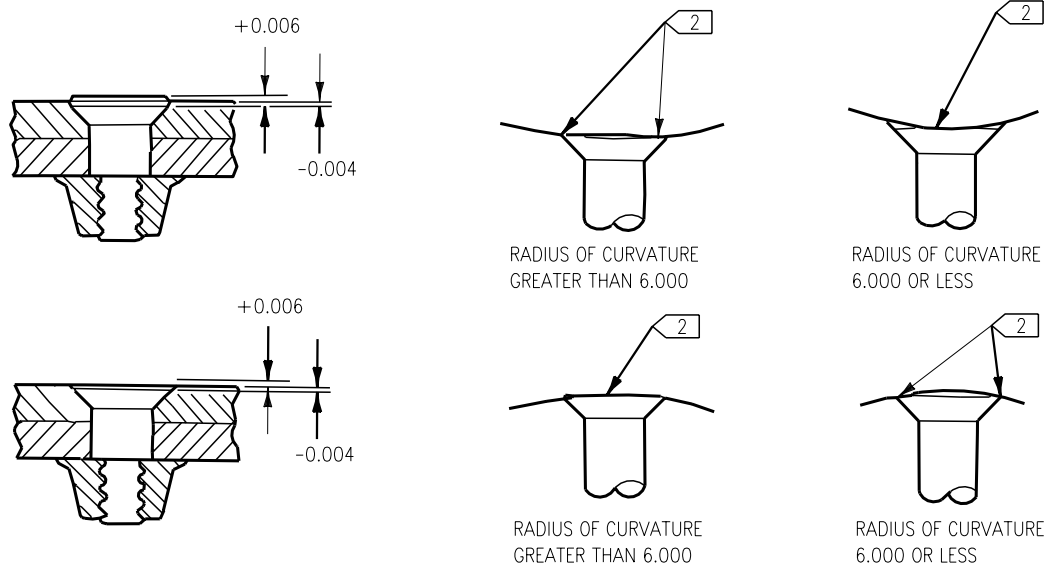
Hi-Lok Removal and Installation (Sheet 2)
